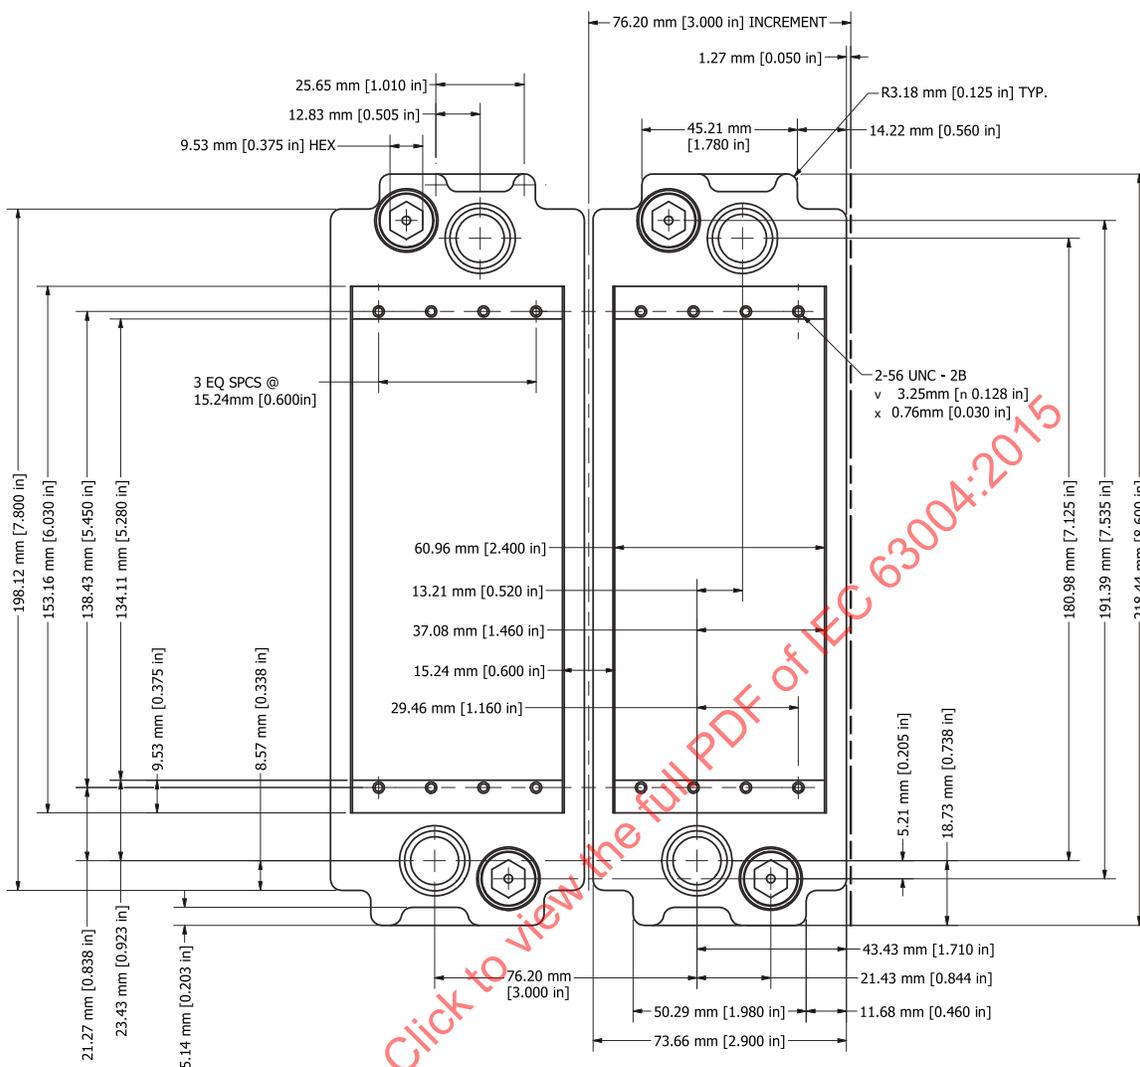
Segmented framework fixture layout design, top view, with connector mount spacing at 15.24 mm (0.60 in), slot spacings with frame rib at 76.2 mm (3.0 in) spacings
